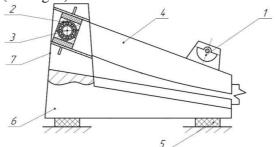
Crusher with a complex movement of the jaw: *I* - vibration exciter; 2 - bearing support; 3 - suspension axis; 4 - upper jaw;
